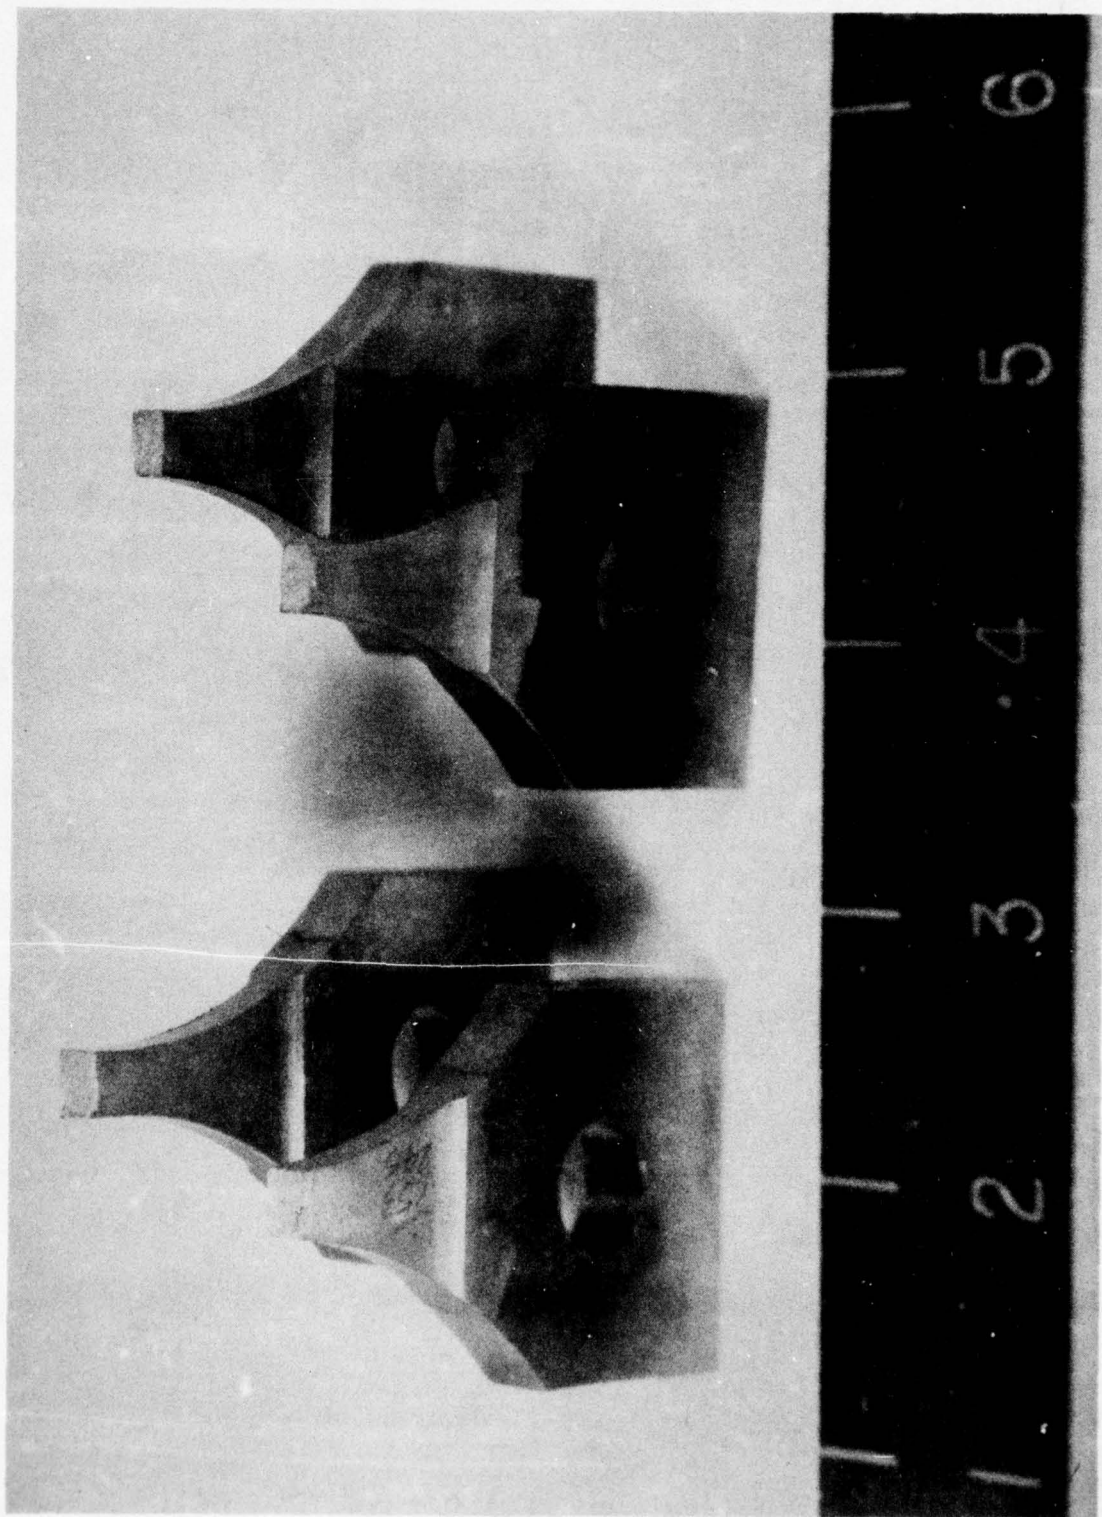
Close-Up View of Fatigue Failure Location
